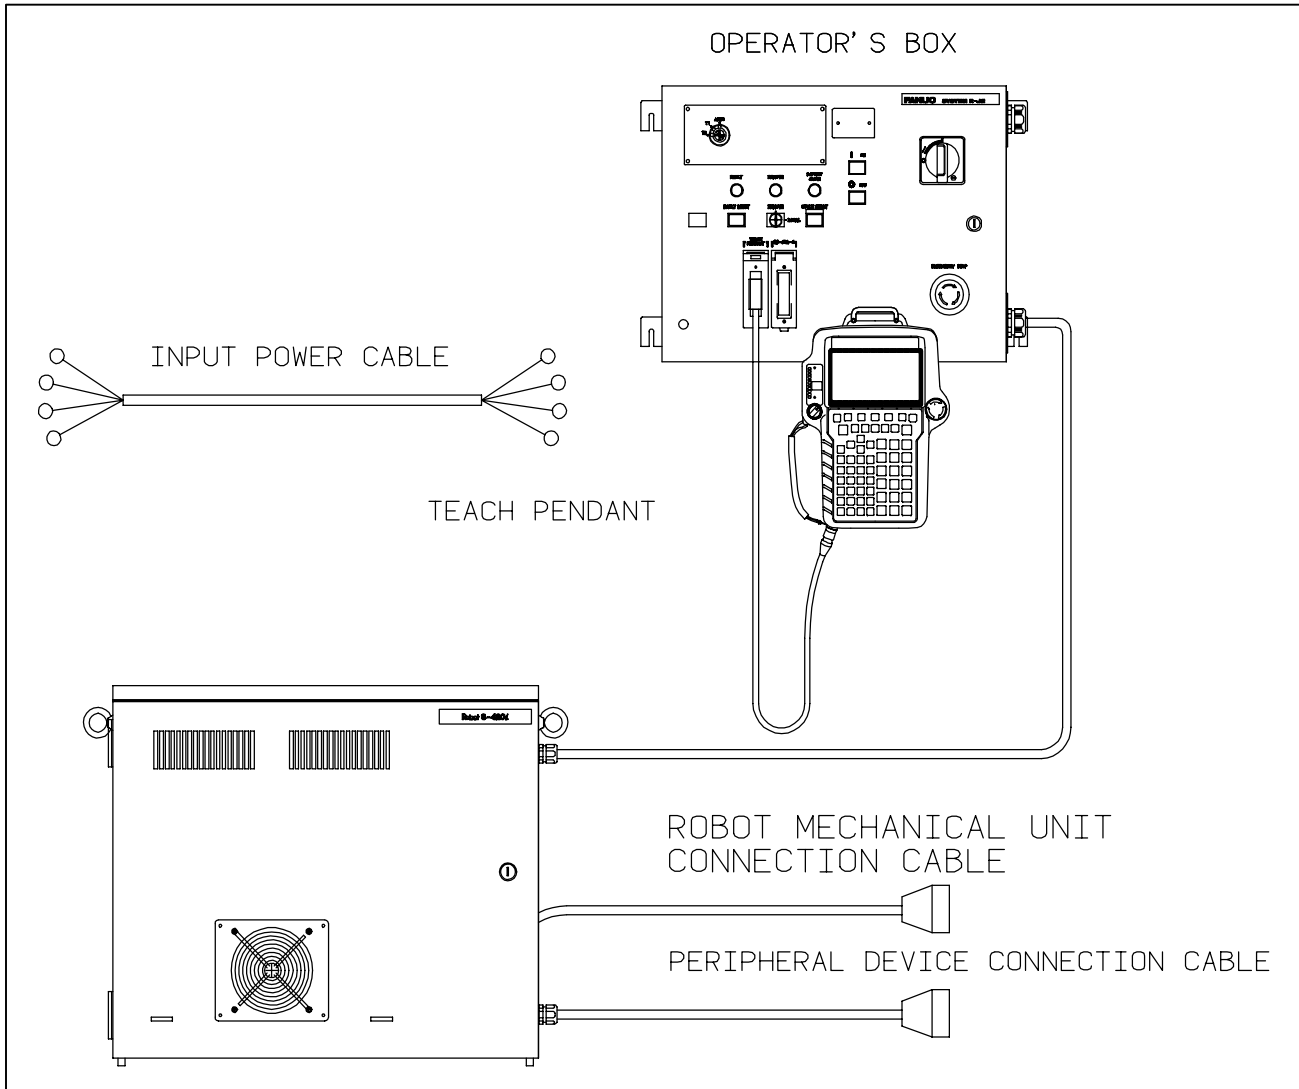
(a) Connecting Cables at Installation (i cabinet)
